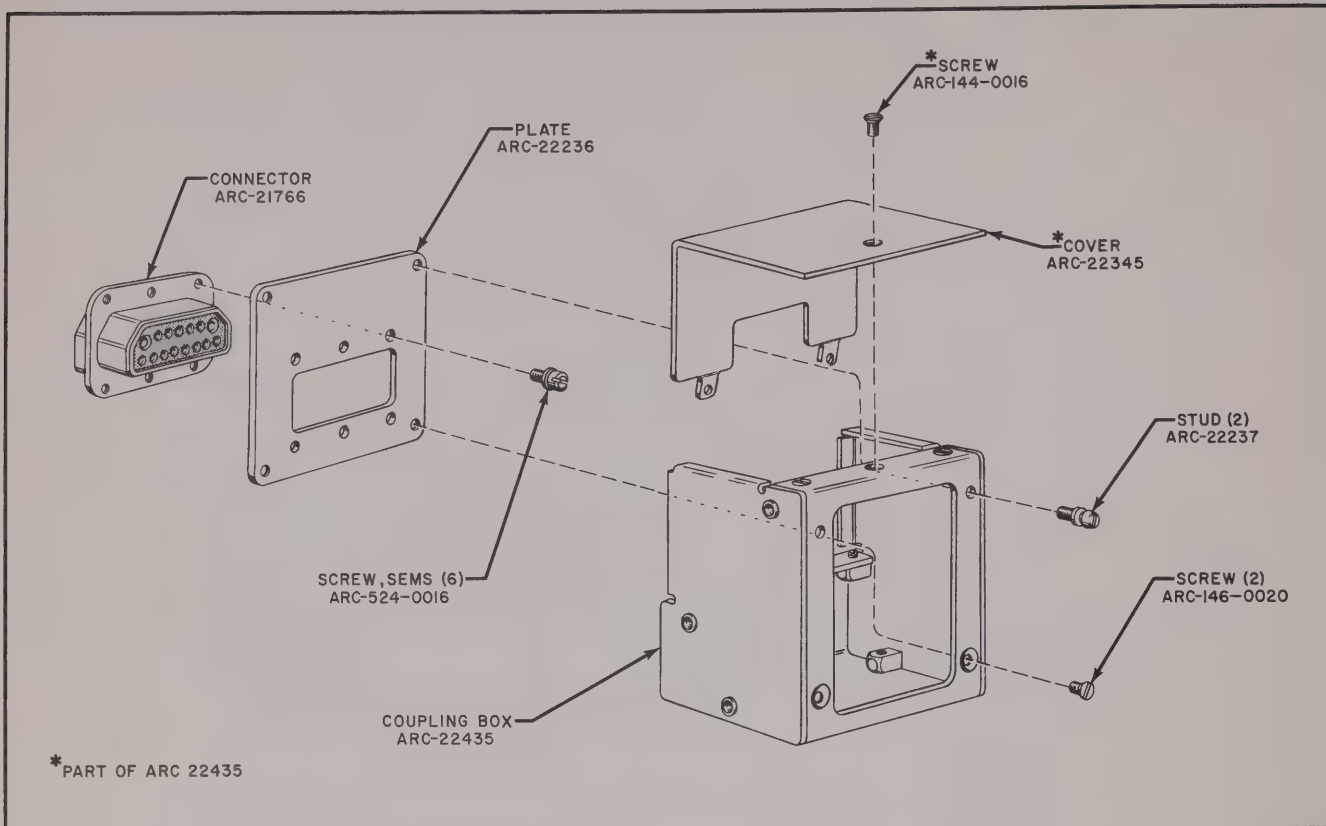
Connector Kit ARC-22445, Assembly Details
